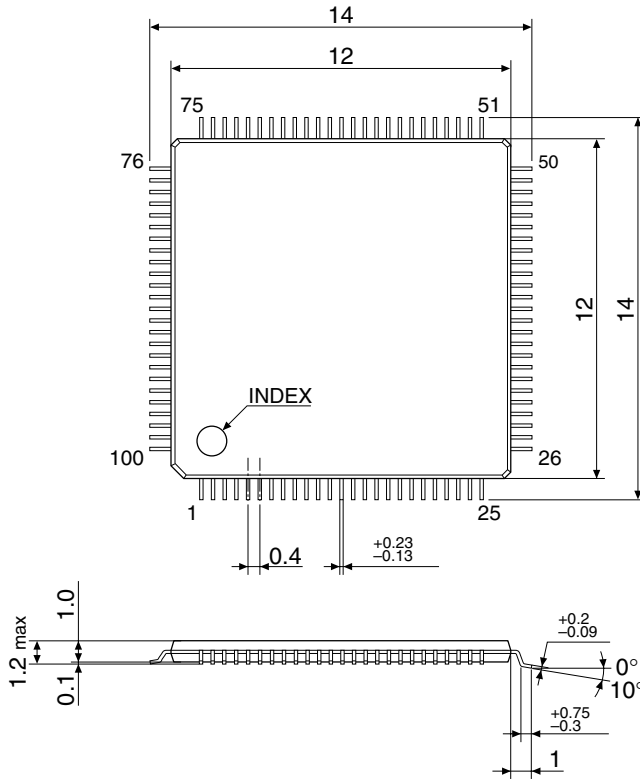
TQFP14-100pin Package Dimensions
